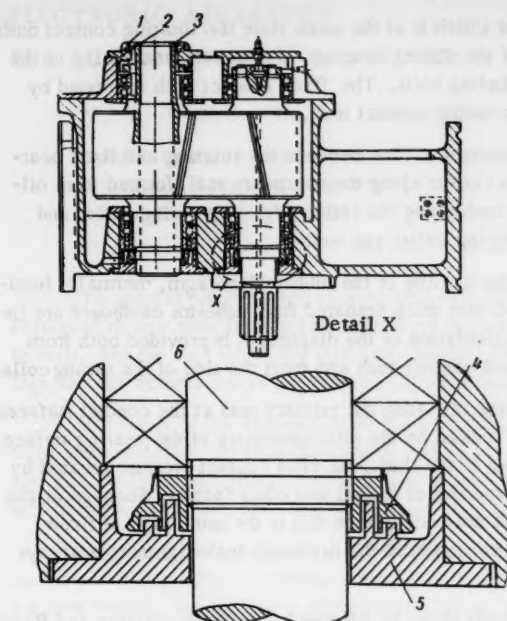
Vertical reduction gear of wire mill. 1) Gasket, 2) cover, 3) seal, 4) and 5) rotating and fixed labyrinth collars, 6) shaft.
